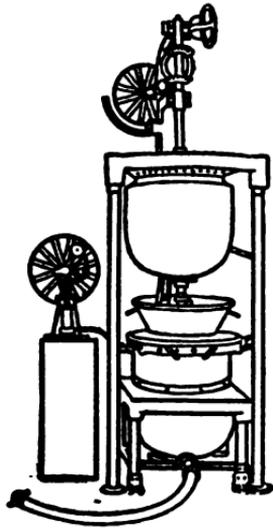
Kettles for melting roller composition. The composition is drained into the lower kettle, which, when filled, is removed and covered tightly and is then run over to the casting apparatus. Here the hot composition is pumped into the bottom of the roller molds.
